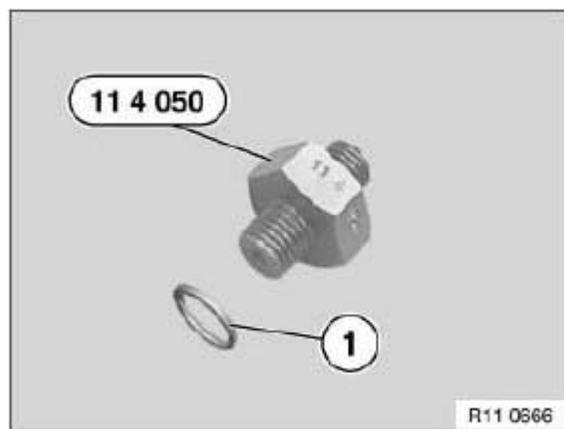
Identifying Special Tool (11 4 050) And Sealing Ring
